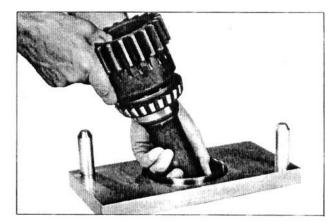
Axle Shaft Positioning in MFN-267Y
